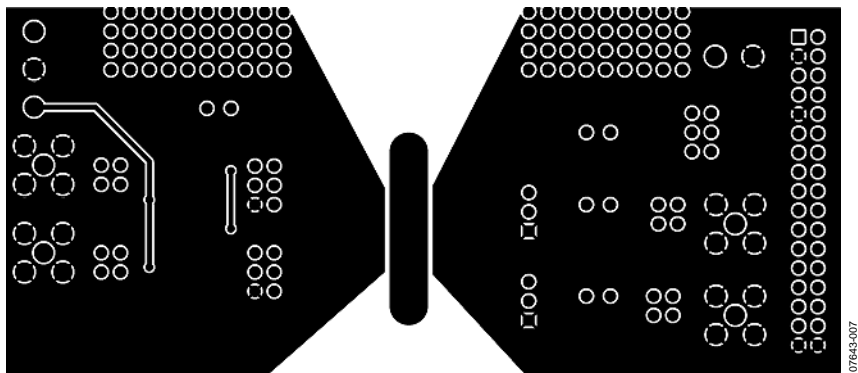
Solder Side Artwork for the EVAL-AD7400A, 8-Lead Surface-Mount PDIP Packages with Gull Wing Leads
